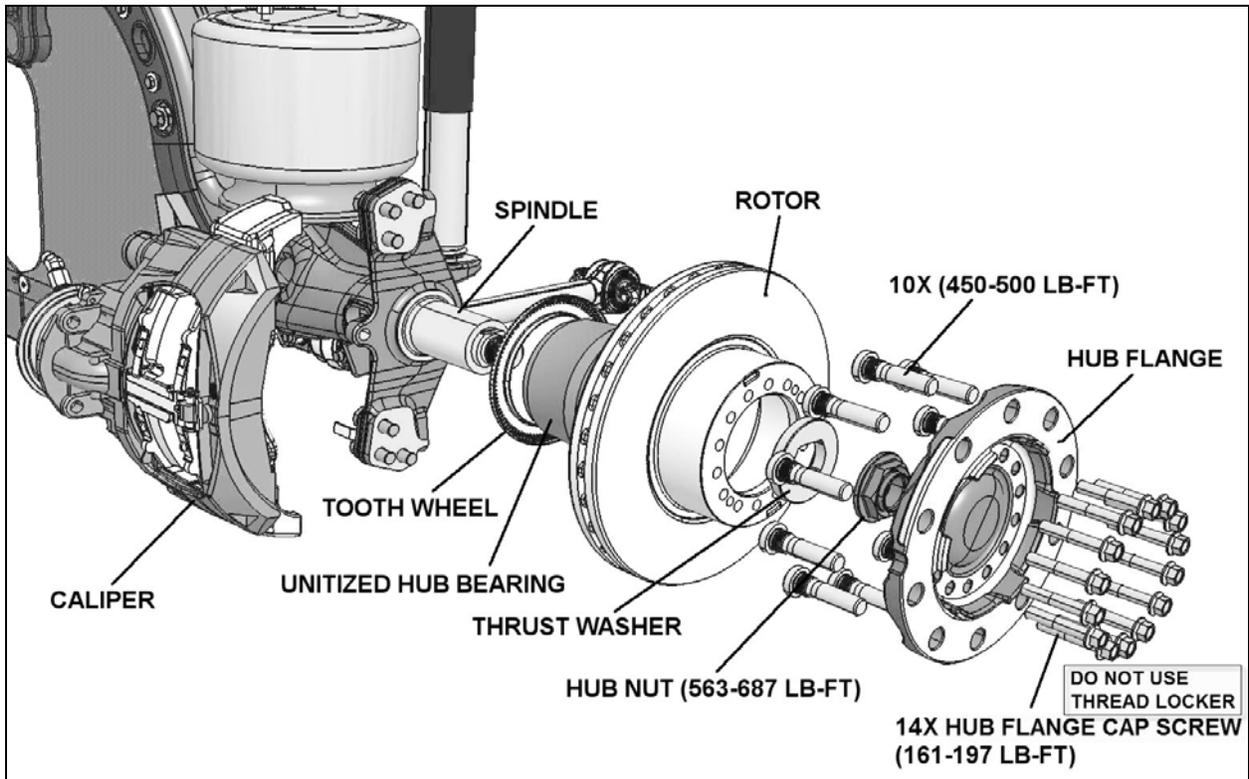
TAG AXLE HUB AND ROTOR ASSEMBLY
